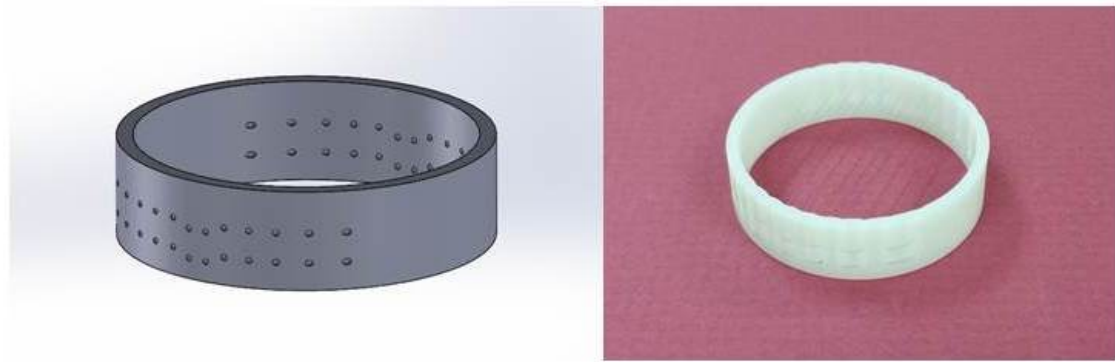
(Left) SolidWorks drawing and (Right) fabricated lens holder for imaging isolated crystalline lenses.
